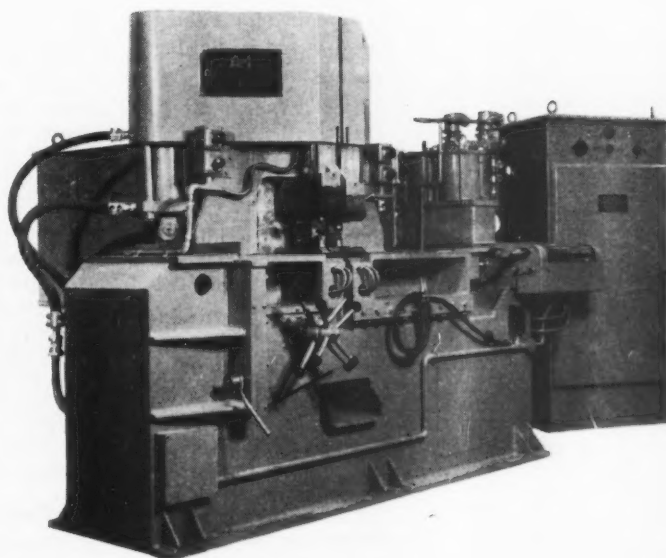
Fully automatic drill and tool flash butt welding machine (A. I. Electric Welding Machines, Ltd.)
